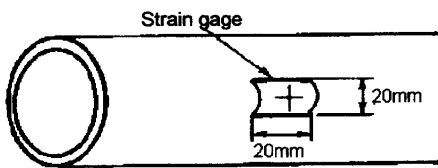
Method for measurement of residual stress after drawing and drawing-expansion forming.
